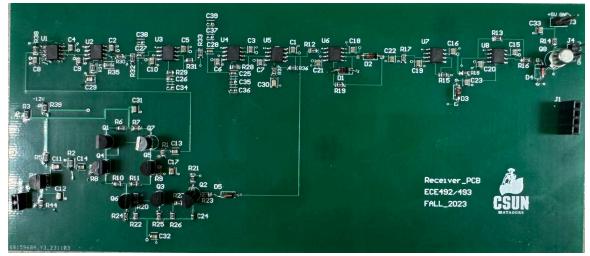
Second Receiver PCB With All Components Soldered (Front)
